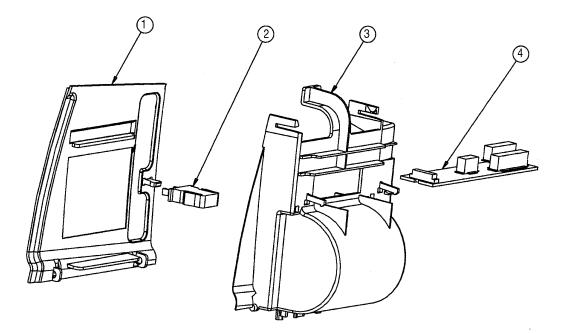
Printer Assembly. 1) Door, 2) Latch, 3) Printer Housing, 4) Printer Interface PWA.
